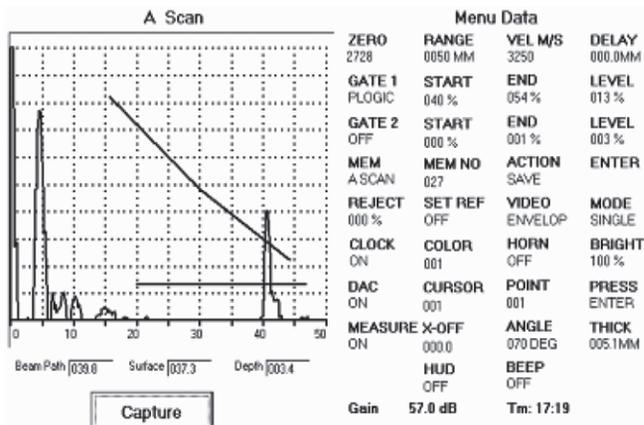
TIG welding has a lack of penetration at 41mm from the work piece's edge
